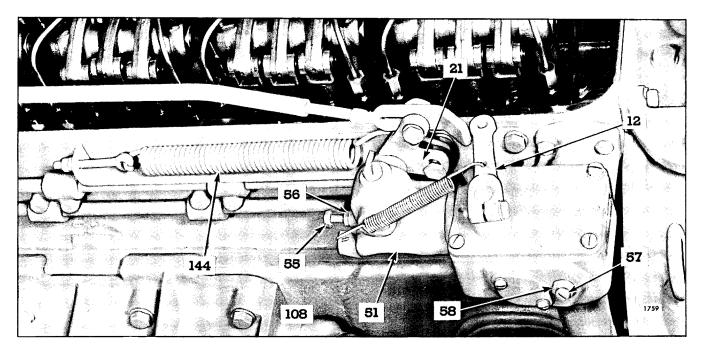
Buffer and Idle Speed Adjusting Screw
